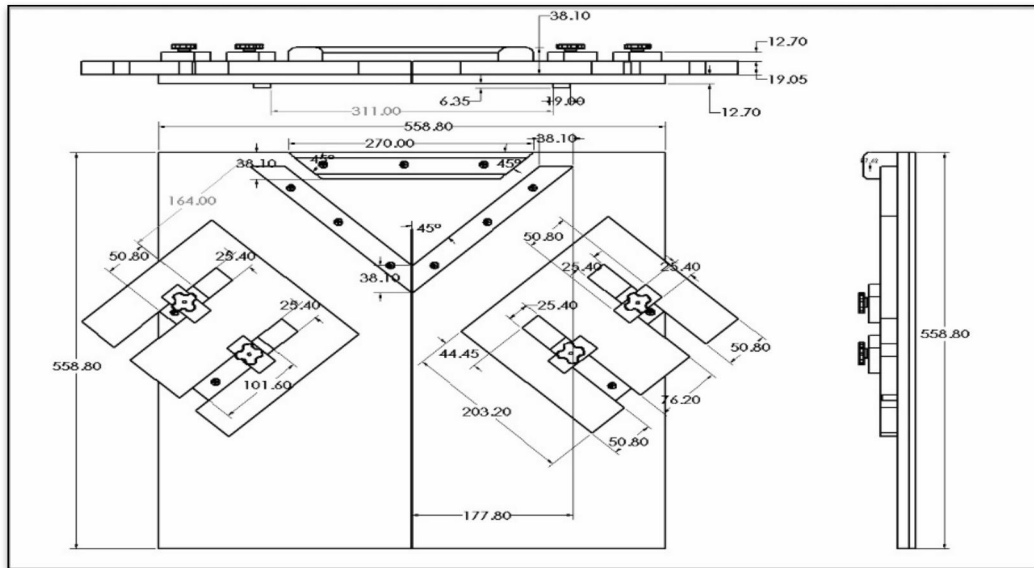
Detailed Drawing of the Designed Sliding Table Jig
